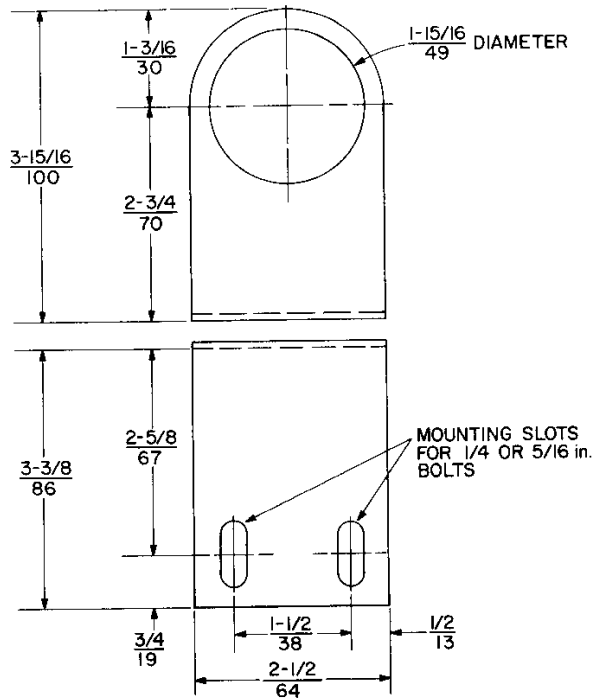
A-4000-143 Mounting Bracket Dimensions $\frac{\text{in.}}{\text{mm}}$
